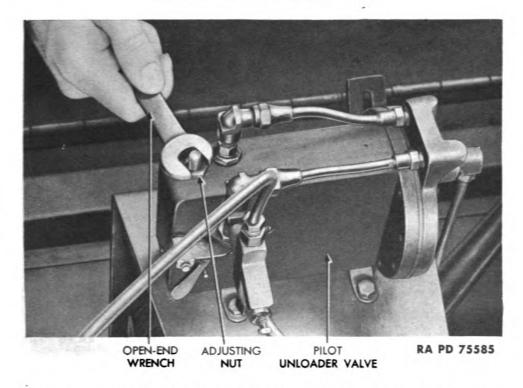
Making Pressure Adjustment on Compressor Unloader Pilot Valve
